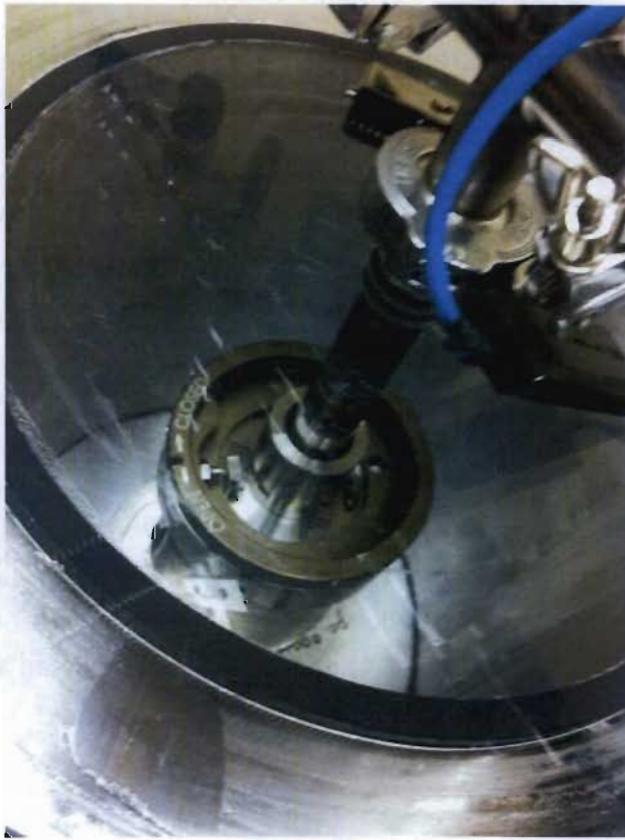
Helium Leak Testing of the Container After Penetration Tests
